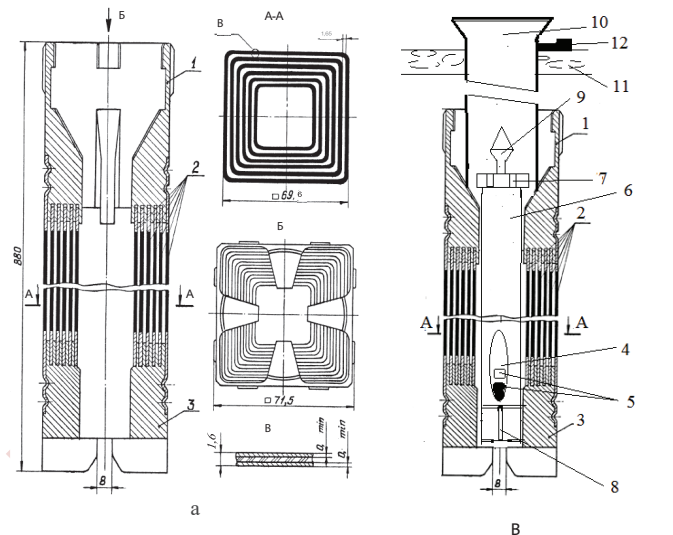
6-tube IRT-4M fuel assembly (a) and special aluminum block container (b). (A) - 6-pin fuel assembly type IRT-4M: 1-head; 2- fuel element; 3 - tail. (B) - special container for irradiation of carbon tetrachloride target: 1-head; 2- fuel element; 3 - tail; 4-quartz ampulla; 5 - target of liquid carbon tetrachloride; 6 - special block container; 7 - coolant inlet hole; 8 - coolant outlet hole; 9 - container head; 10 - vertical guide pipe; 11 - reactor platform; 12 - bracket for fixing the guide pipe.
